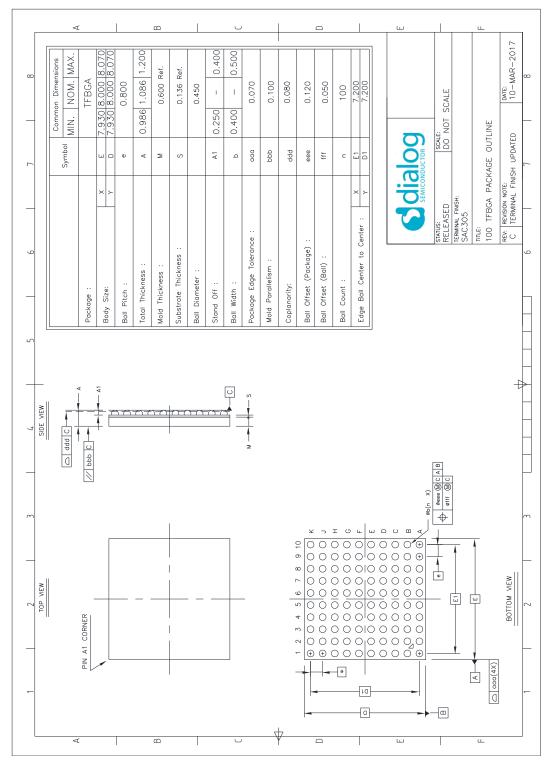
Package Outline Drawing 100 TFBGA 0.45 mm Ball Diameter
